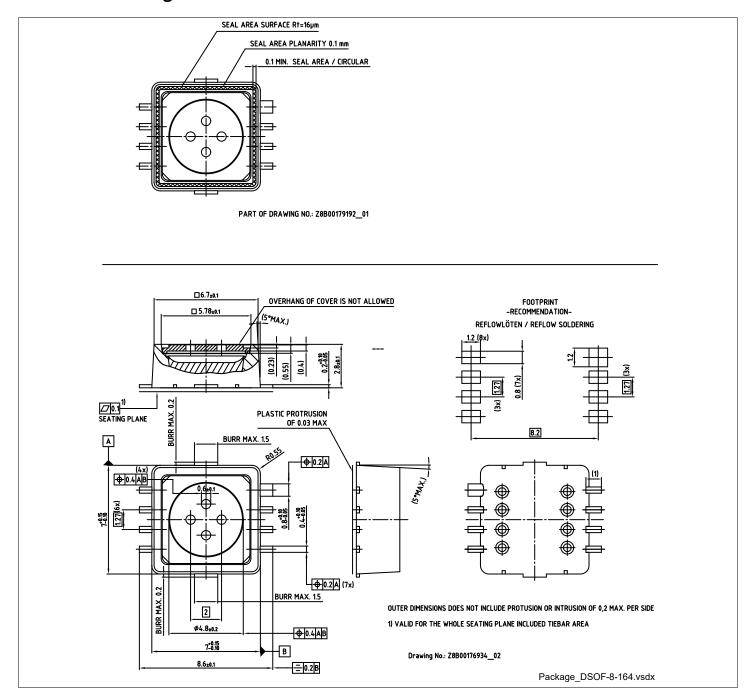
PG-DSOF-8-164 package outline (all dimensions in mm)
